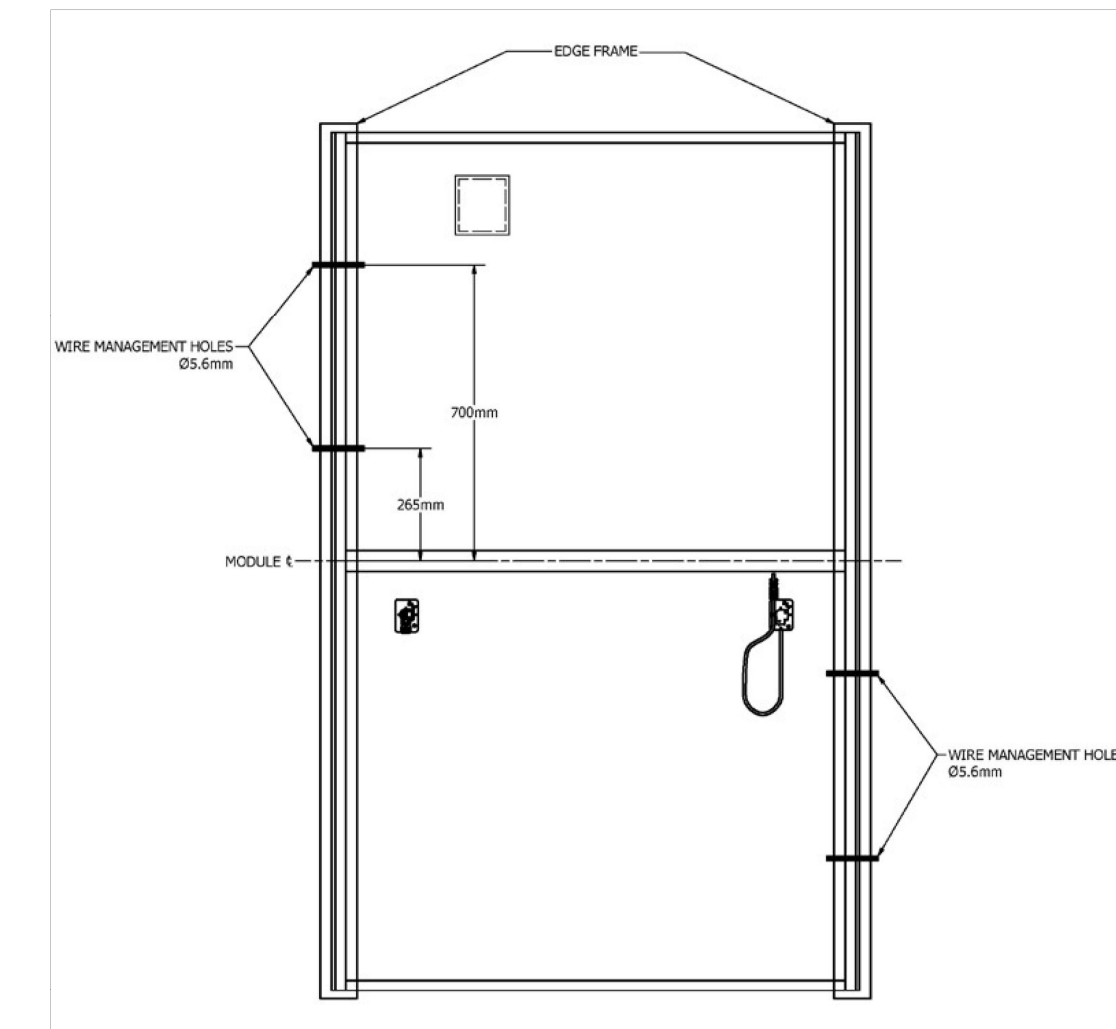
The above-ground DC cabling (typically a bundle of Harnesses and PV array cables) may be supported by the wire management holes located on the Series 6 Module Edge Frames.
